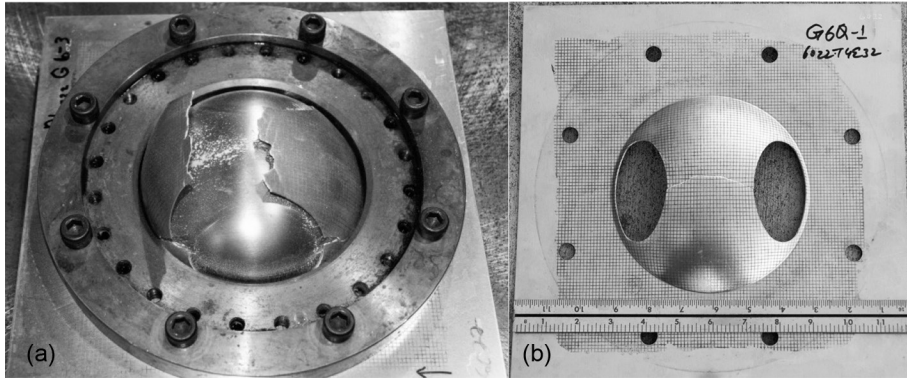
Images of tested AA6022 specimens. (a) EHF tested specimen showing the fractured AA6022 sheet with an underlying, intact driver sheet. (b) Quasi-statically tested specimen with failure across the specimen apex (driver sheet is not shown).
